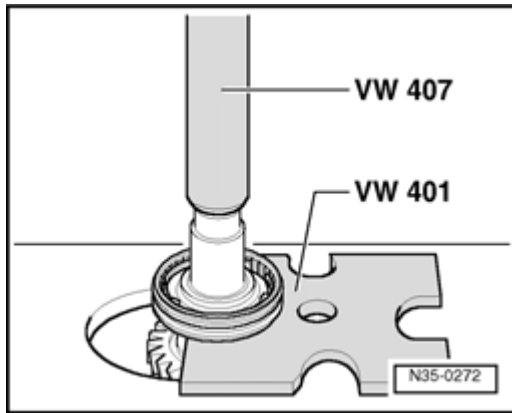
Pressing off 5th gear synchro-hub/locking collar with spacer sleeve
